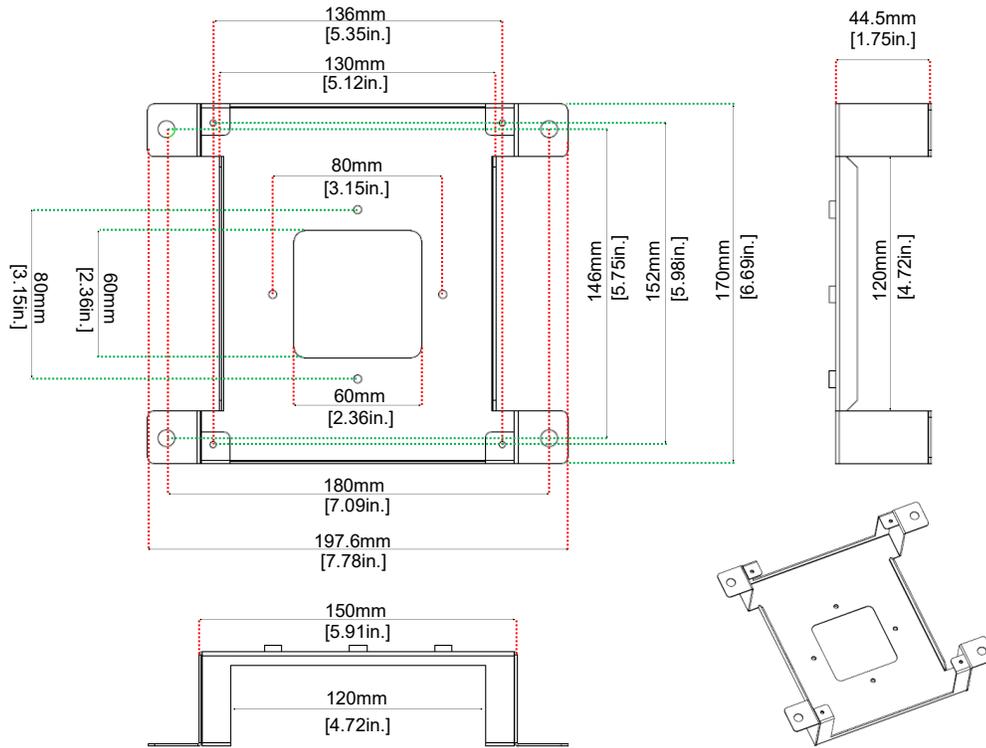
APV3-BDA - Flush Mount Bracket Dimensions
